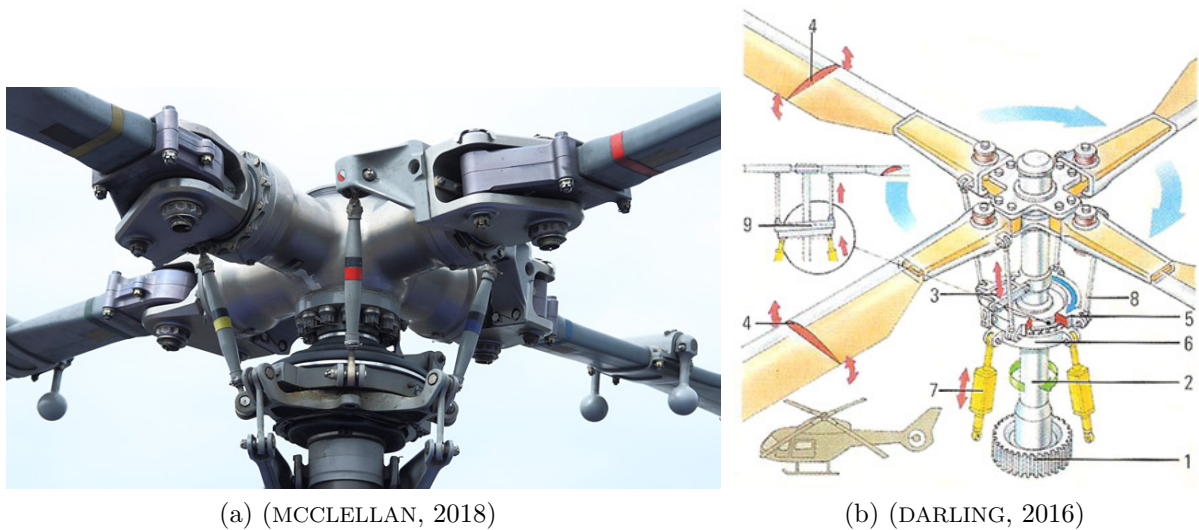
(a) Picture of a helicopter main rotor head and (b) a schematic representation, in which number 2 indicates the main rotor shaft
